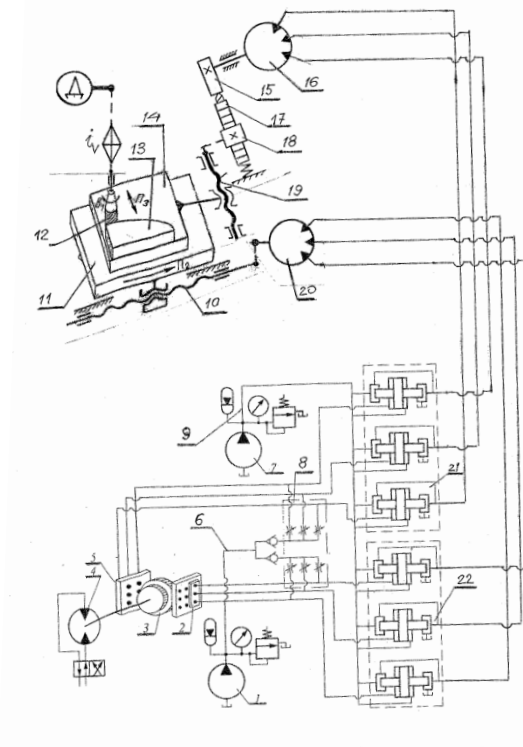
Block diagram of a copy-milling machine with internal hydraulic connections
